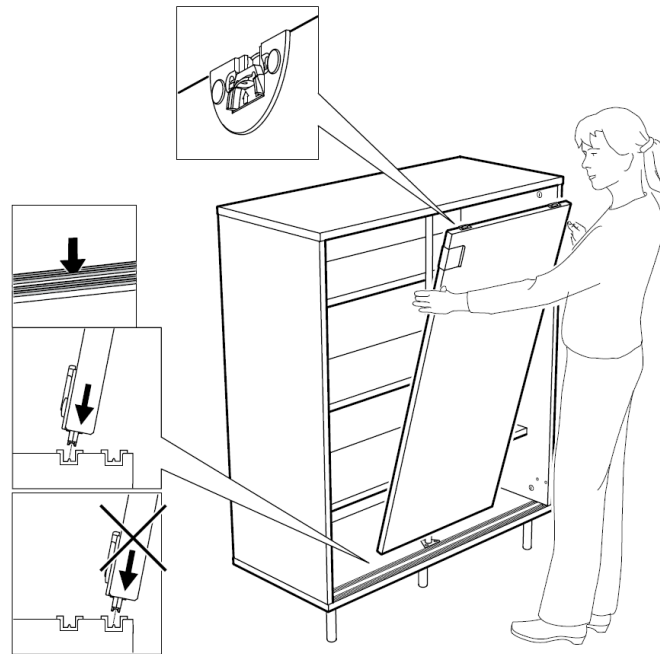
Mounting of Mackapär cabinet doors [6].
